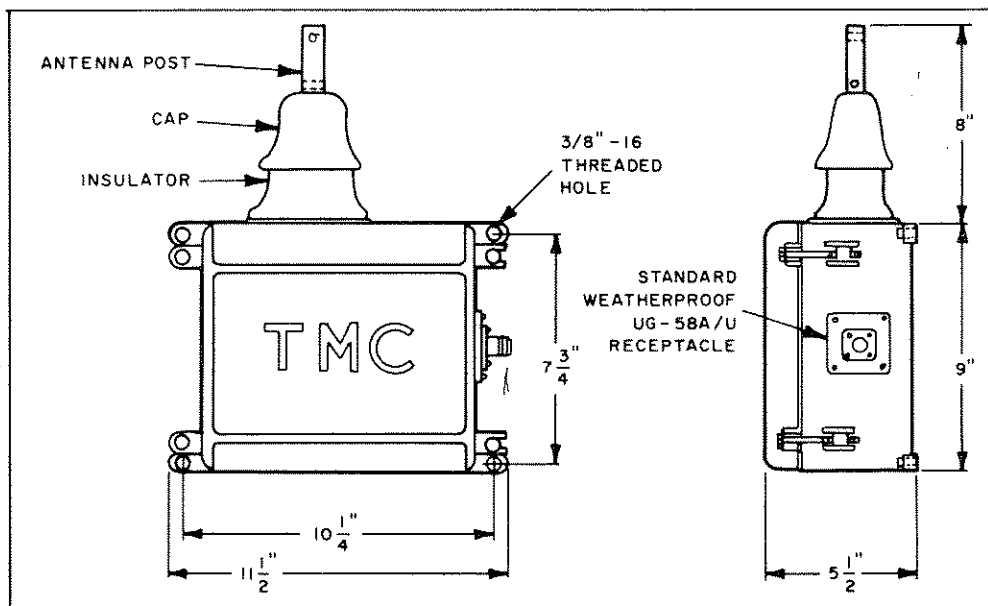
OUTLINE DIMENSIONAL DRAWING
